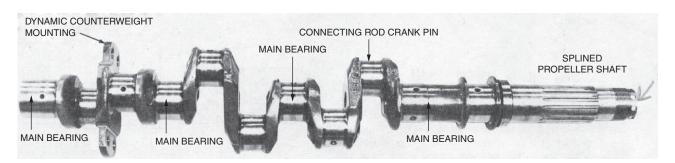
Crankshaft for a six-cylinder opposed engine with a splined propeller shaft.
